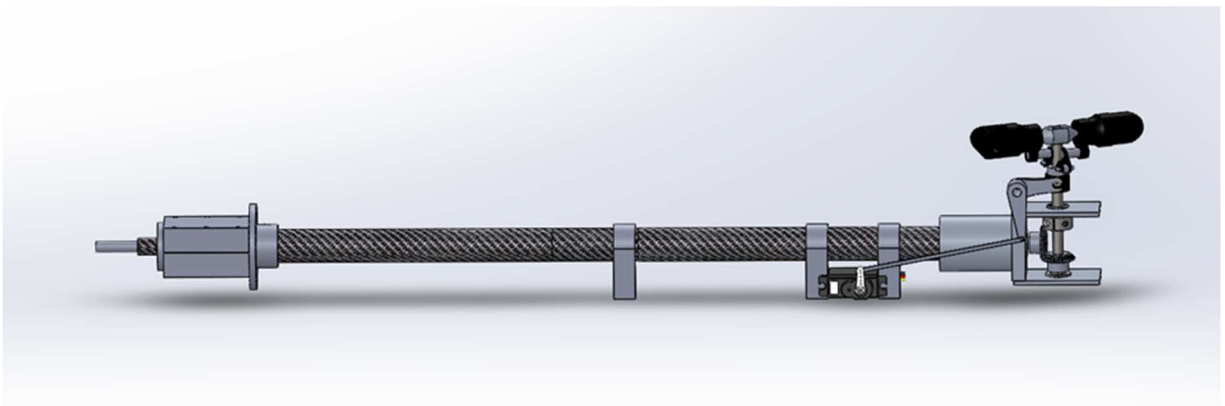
4: A 3D CAD drawing of the rotor arm assembly. Rotor blades are not installed.
